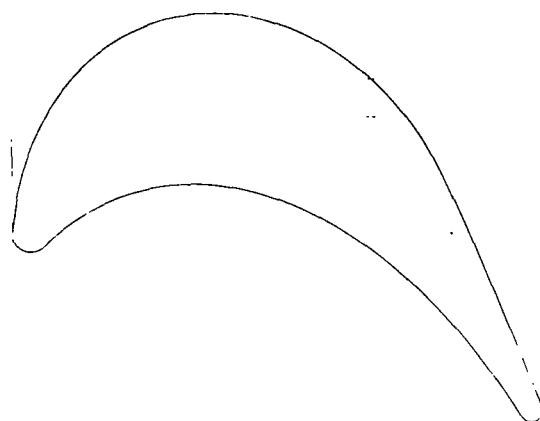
Mark 48-F Turbine First-Stage Rotor Blade Shape
